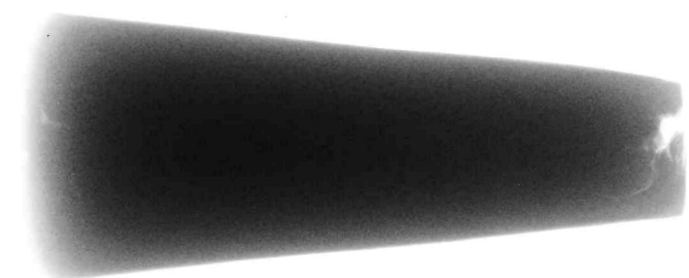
Defects in the axe-blade made visible by X-ray photography: left: crack in the cutting edge; right: casting-pipe cavity, deformed by hammering for shaping the neck.
